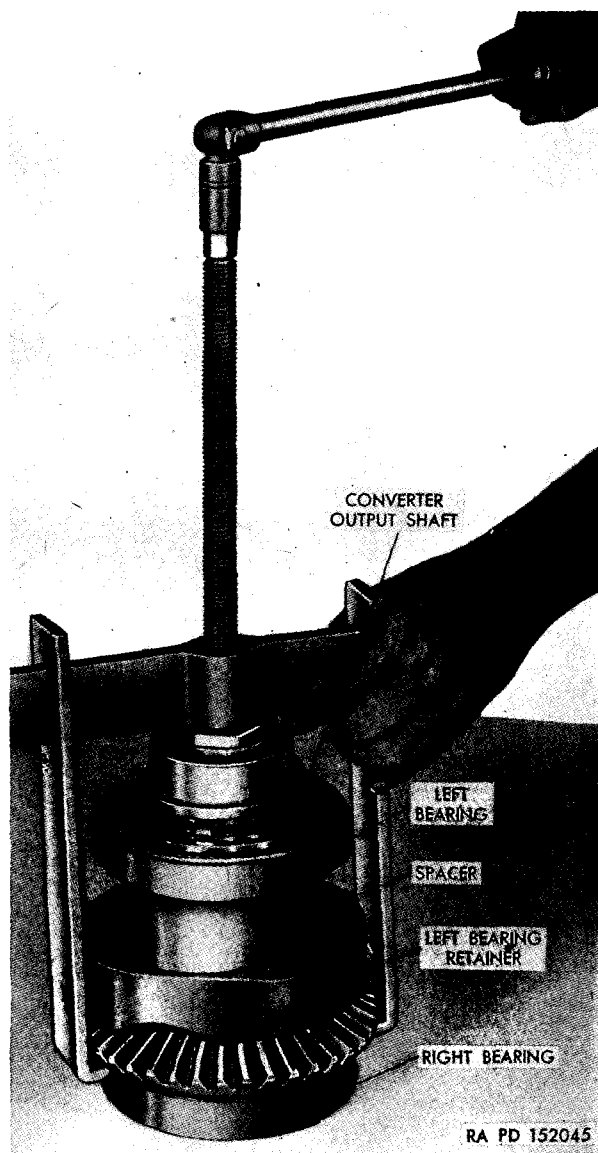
Removing converter driving bevel gear, spacer, retainer and left bearing.
